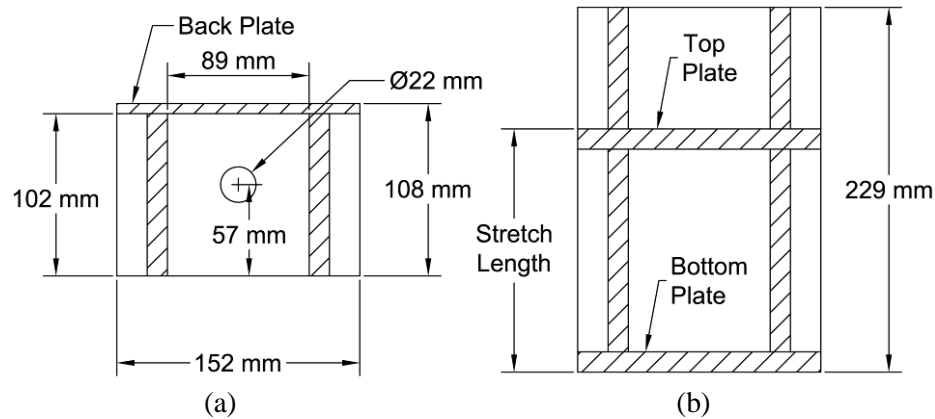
Steel chair dimensions: (a) plan view; (b) front elevation
